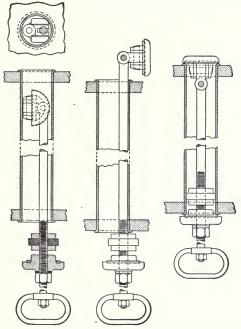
Tube-Stopper Designed for Insertion without Drawing Fire.
